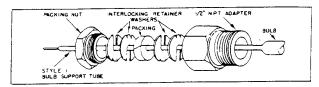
Part No. FTG13A-600 packing nut assembly. (Used with swaged bulb with support tube for direct immersion application.)
